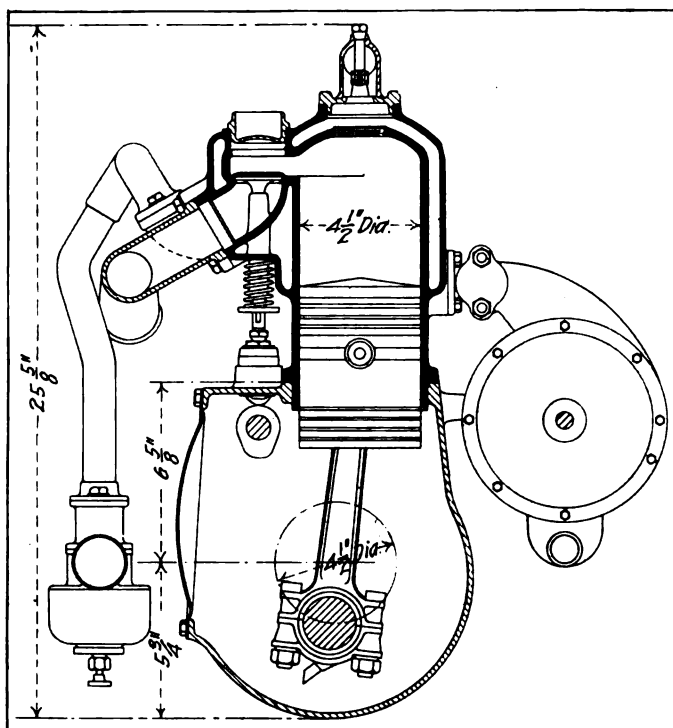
Rambler 1913 cars will have longer connecting-rods and larger valves
